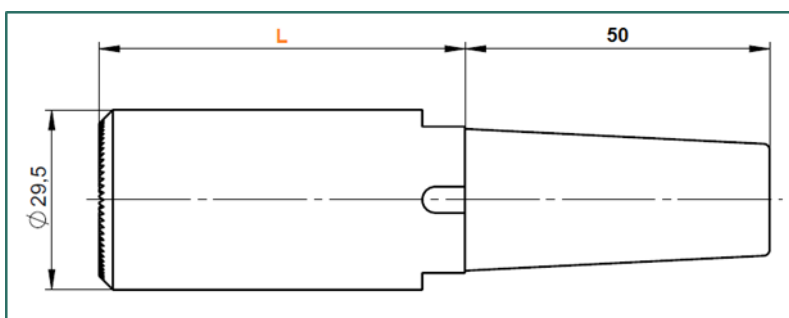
DIMENSIONS OF THE MUTARS® HMRS ADAPTER MALE TAPER
